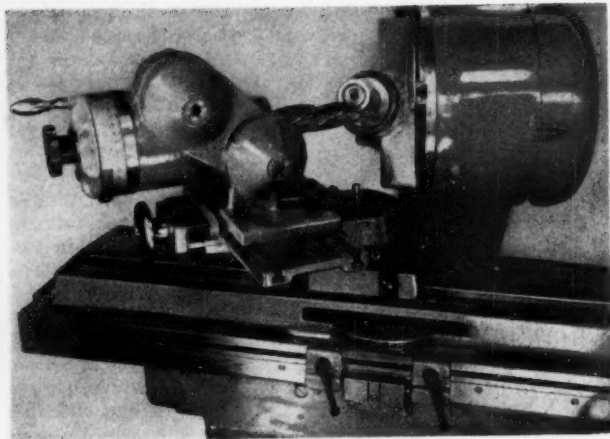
The Grinding Head on the Reinecker ZSW5 Machine is Almost Totally Enclosed, and may be Adjusted through 360 deg. in the Vertical and Horizontal Planes, and Tilted through 30 deg.
